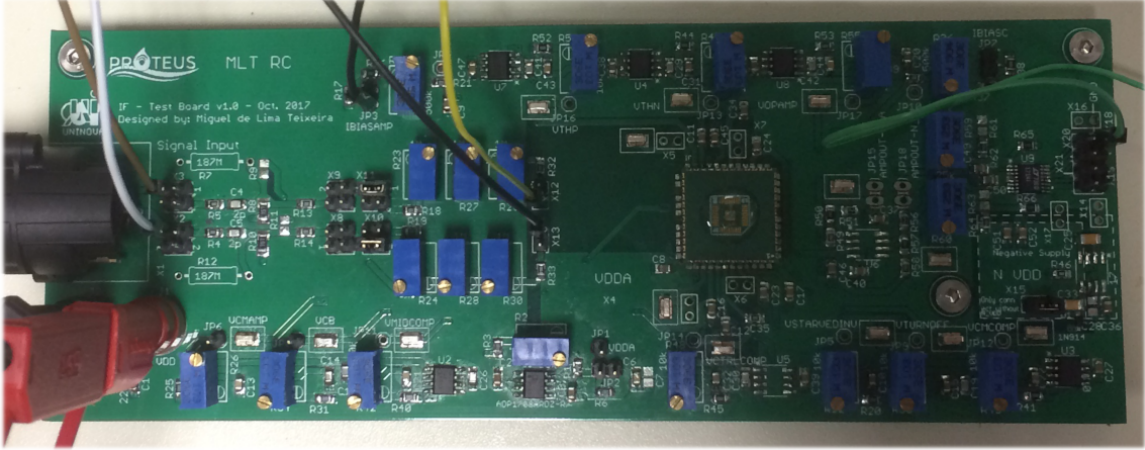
PCB IFC prototype test board, assembled for Analog IFC chip measurement. Full Assemble, analog IFC first version, chip without TFF in pulse outputs.
